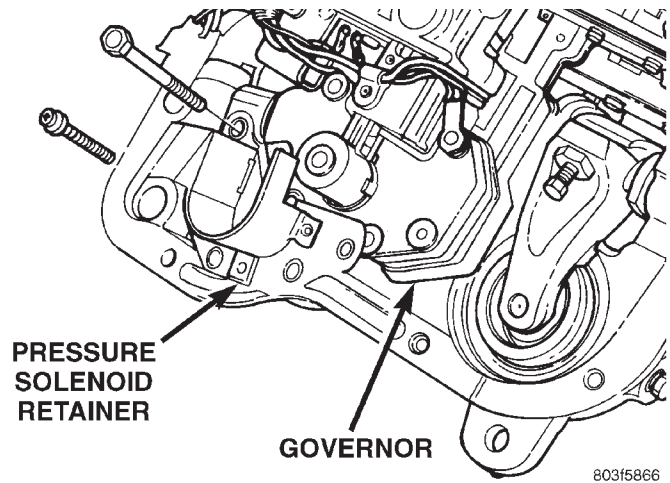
Governor Body And Retainer Plate Attaching Screw
